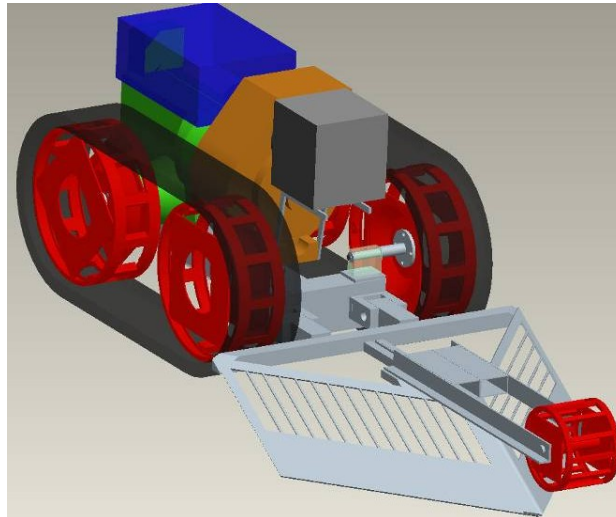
Air compressor (grey box) and valve bay (blue box) mounted on the machine model.
